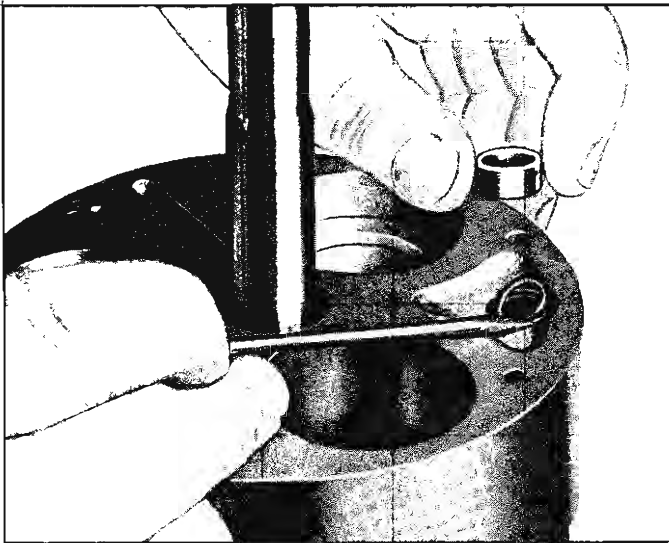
Installing Discharge Crossover Tube Front "O" Ring and Spacer
